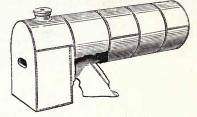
Explosion of a locomotive-boiler from corrosive-grooving.
